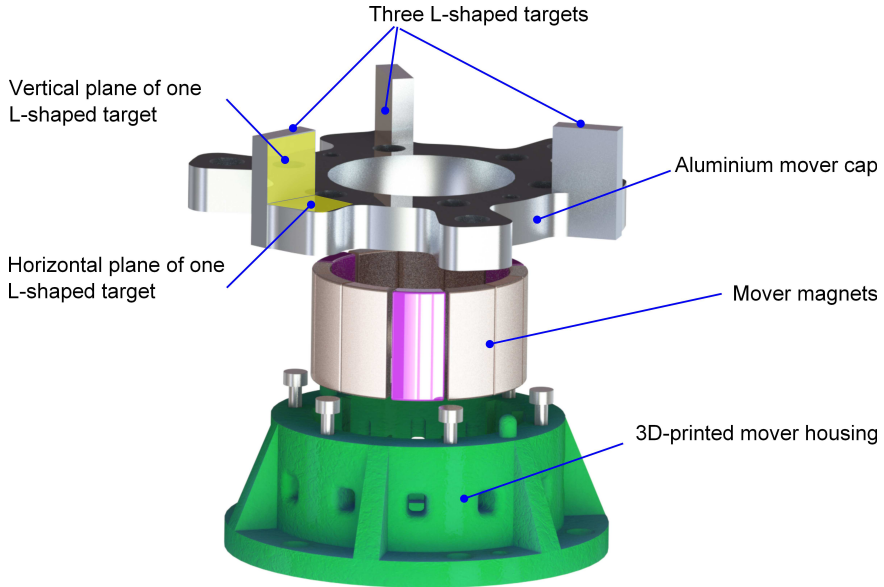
Exploded view of the mechanical design of the mover. The mover consists of 12 magnet segments. The purple indicates the opposing magnets. The magnets are glued in a 3D-printed housing. The mover cap fastens the magnets in the vertical direction. The mover cap is CNC machined with L-shaped targets for the internal proximity sensors.
